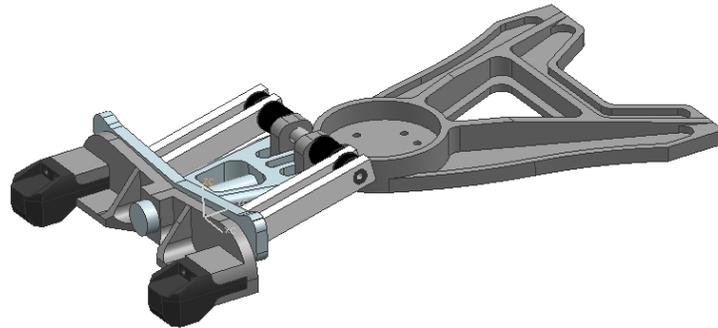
Latest CAD model of the passive mechanical locking design.
